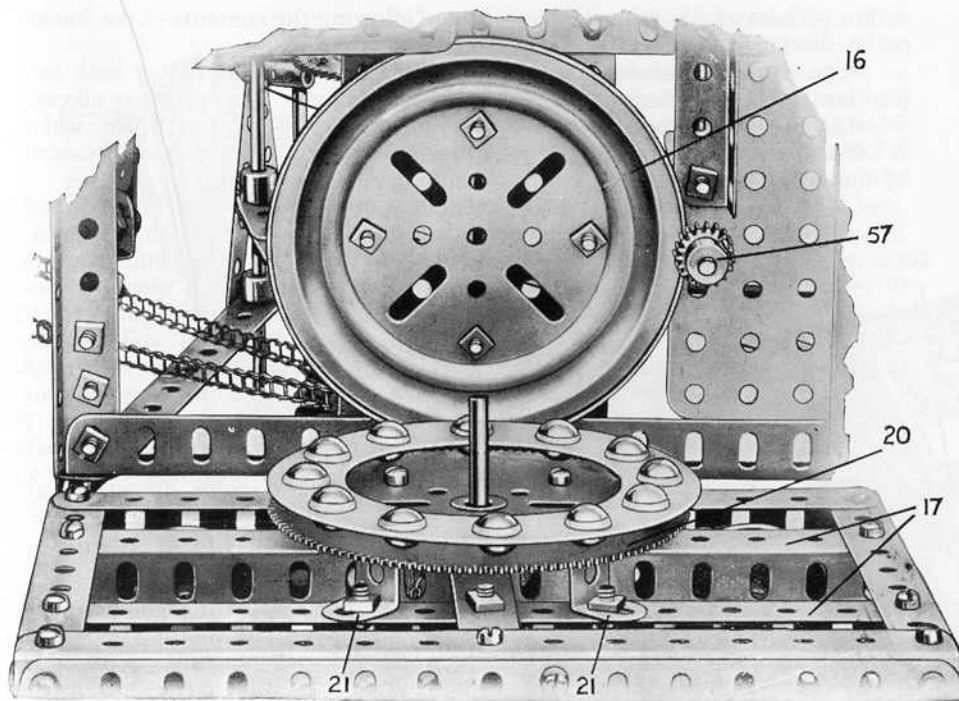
The Ball Bearing unit, with upper Race raised to show details
